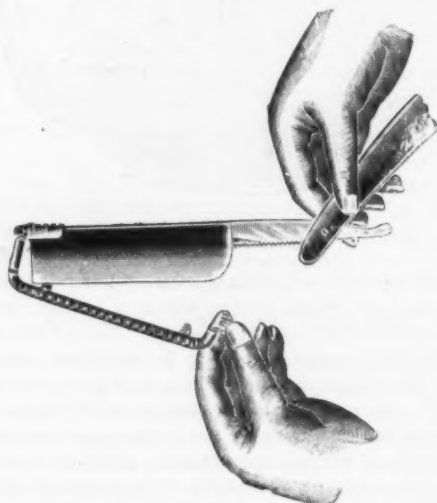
Showing Guard in Process of Attachment to Blade.
